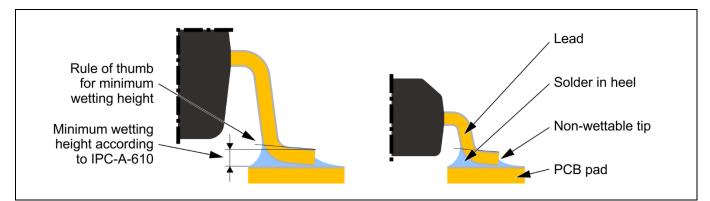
Schematic depictions of the backward PCB pad extension for optimal solder fillet formation in heel according to a rule of thumb and to the IPC-A-610 [6].
